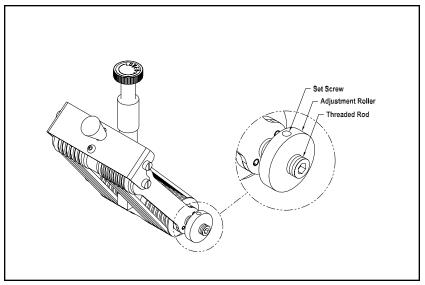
Horizon Adjustment Mechanism (shown on Advancing O-Ring Gate)
